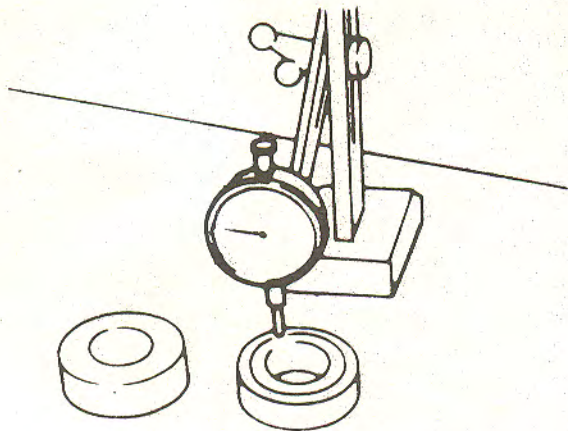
Comparing the heights of the dummy bearing and the actual pinion bearing with a dial gauge (on a surface plate).
